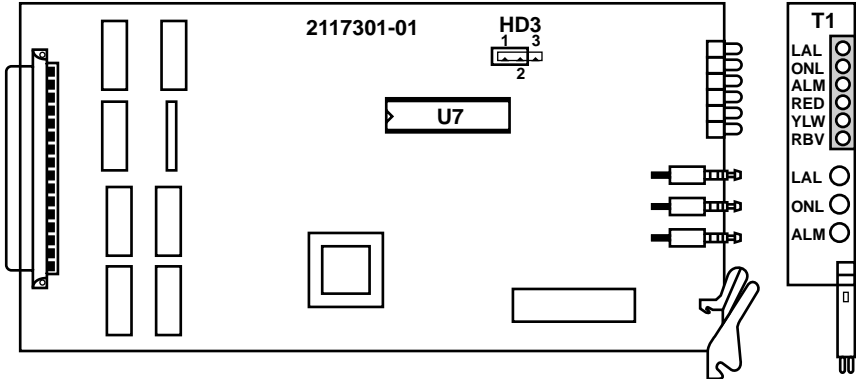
T1 Logic Card Front Plug Assembly.
